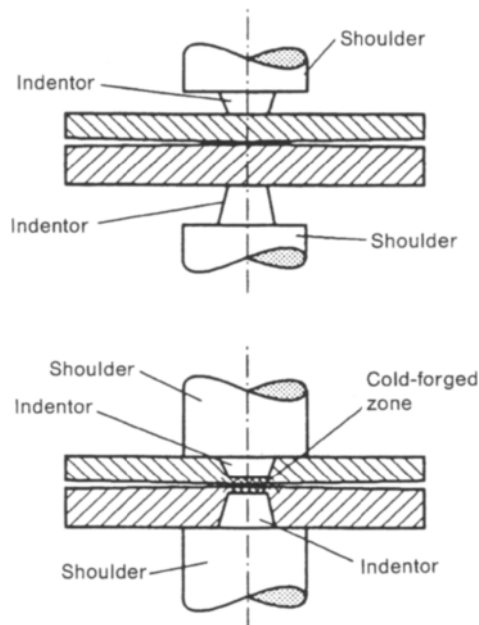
Cold pressure welding. (Reprinted with permission from *ASM Metals Handbook, Ninth Edition*, Vol. 6, Welding Brazing and Soldering (1993), ASM International, Materials Park, OH 44073-0002, p. 302, Fig. 8.)
